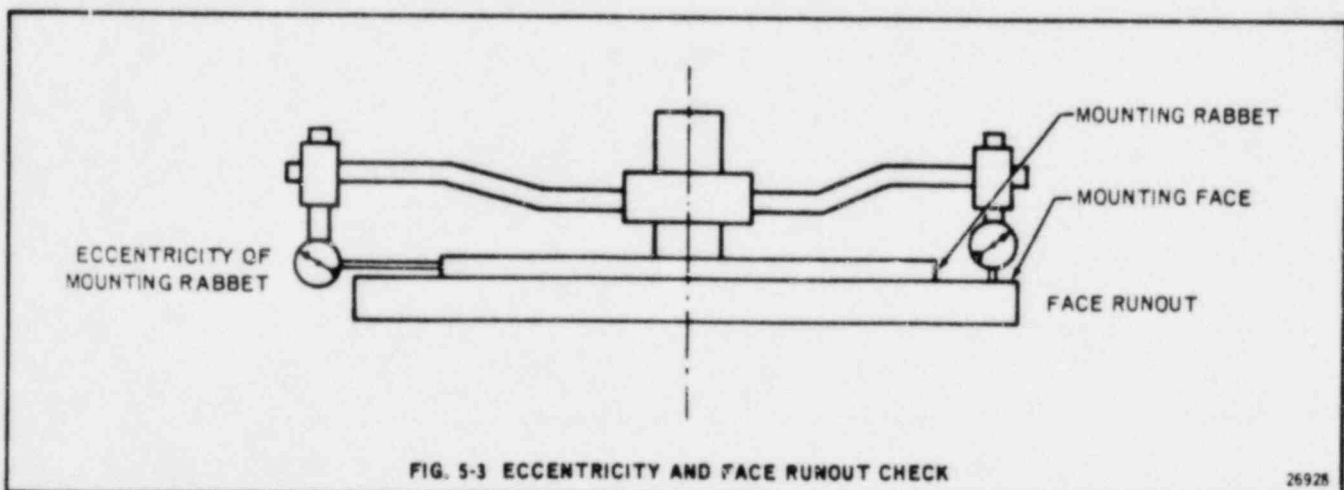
ECCENTRICITY AND FACE RUNOUT CHECK
